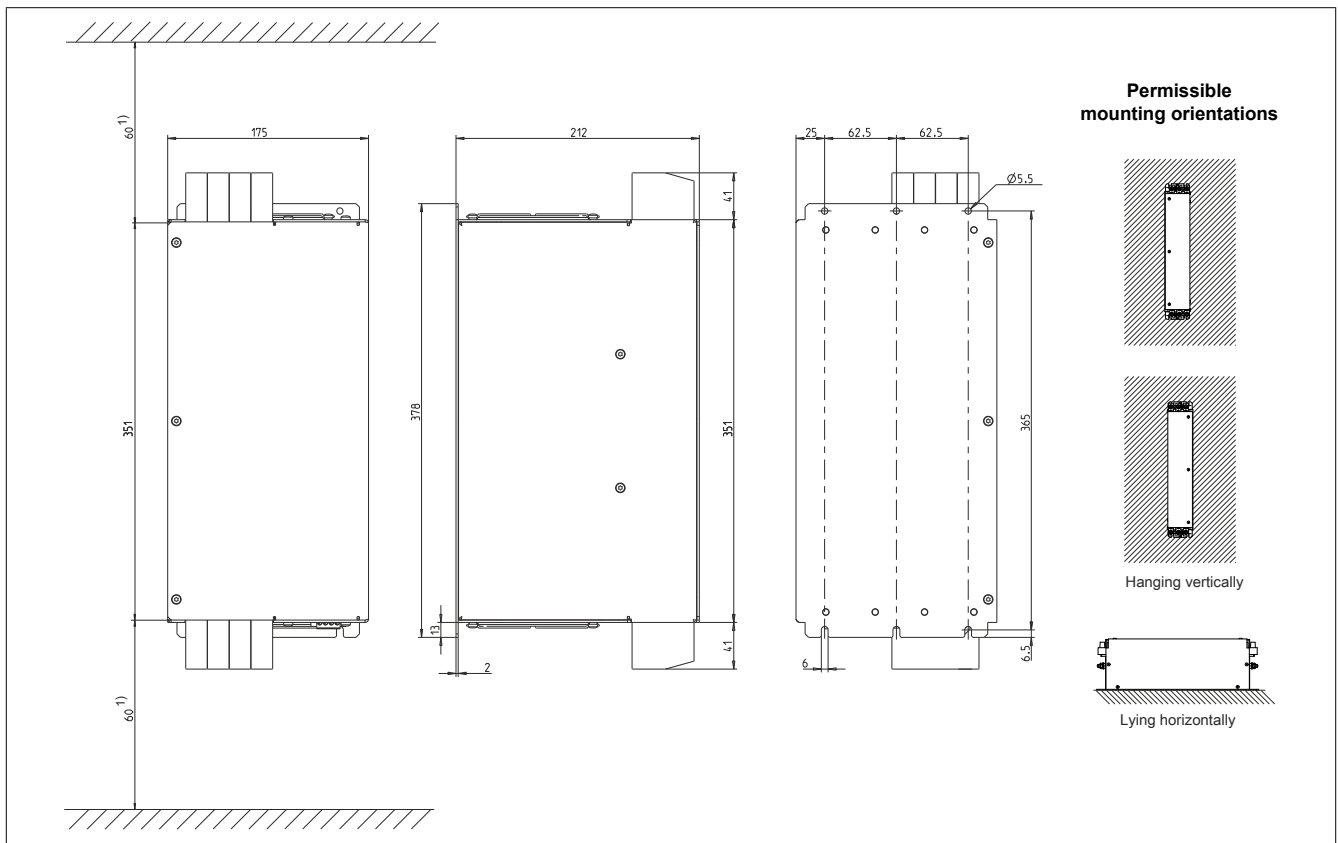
8BVF0880H000.000-1 - Dimension diagram and installation dimensions (up to revision E0)
